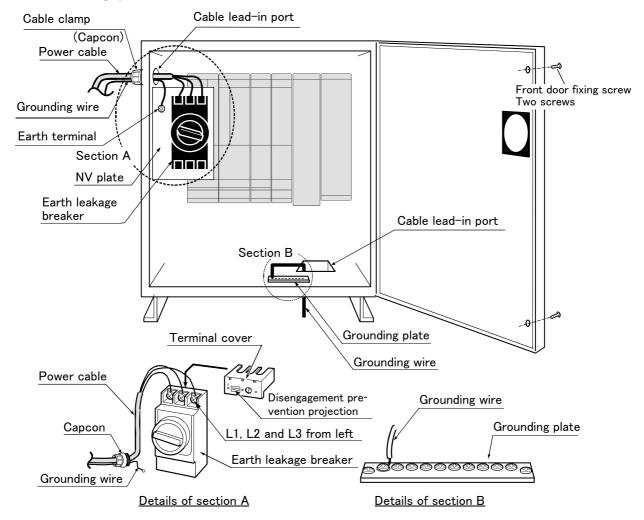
Connecting the power cable and grounding cable (CR760 non-CE marking)
